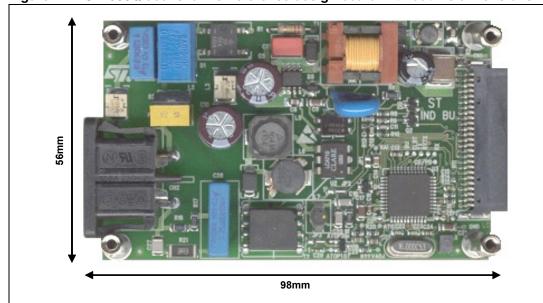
ST7538Q dual channel reference design board with outline dimensions
